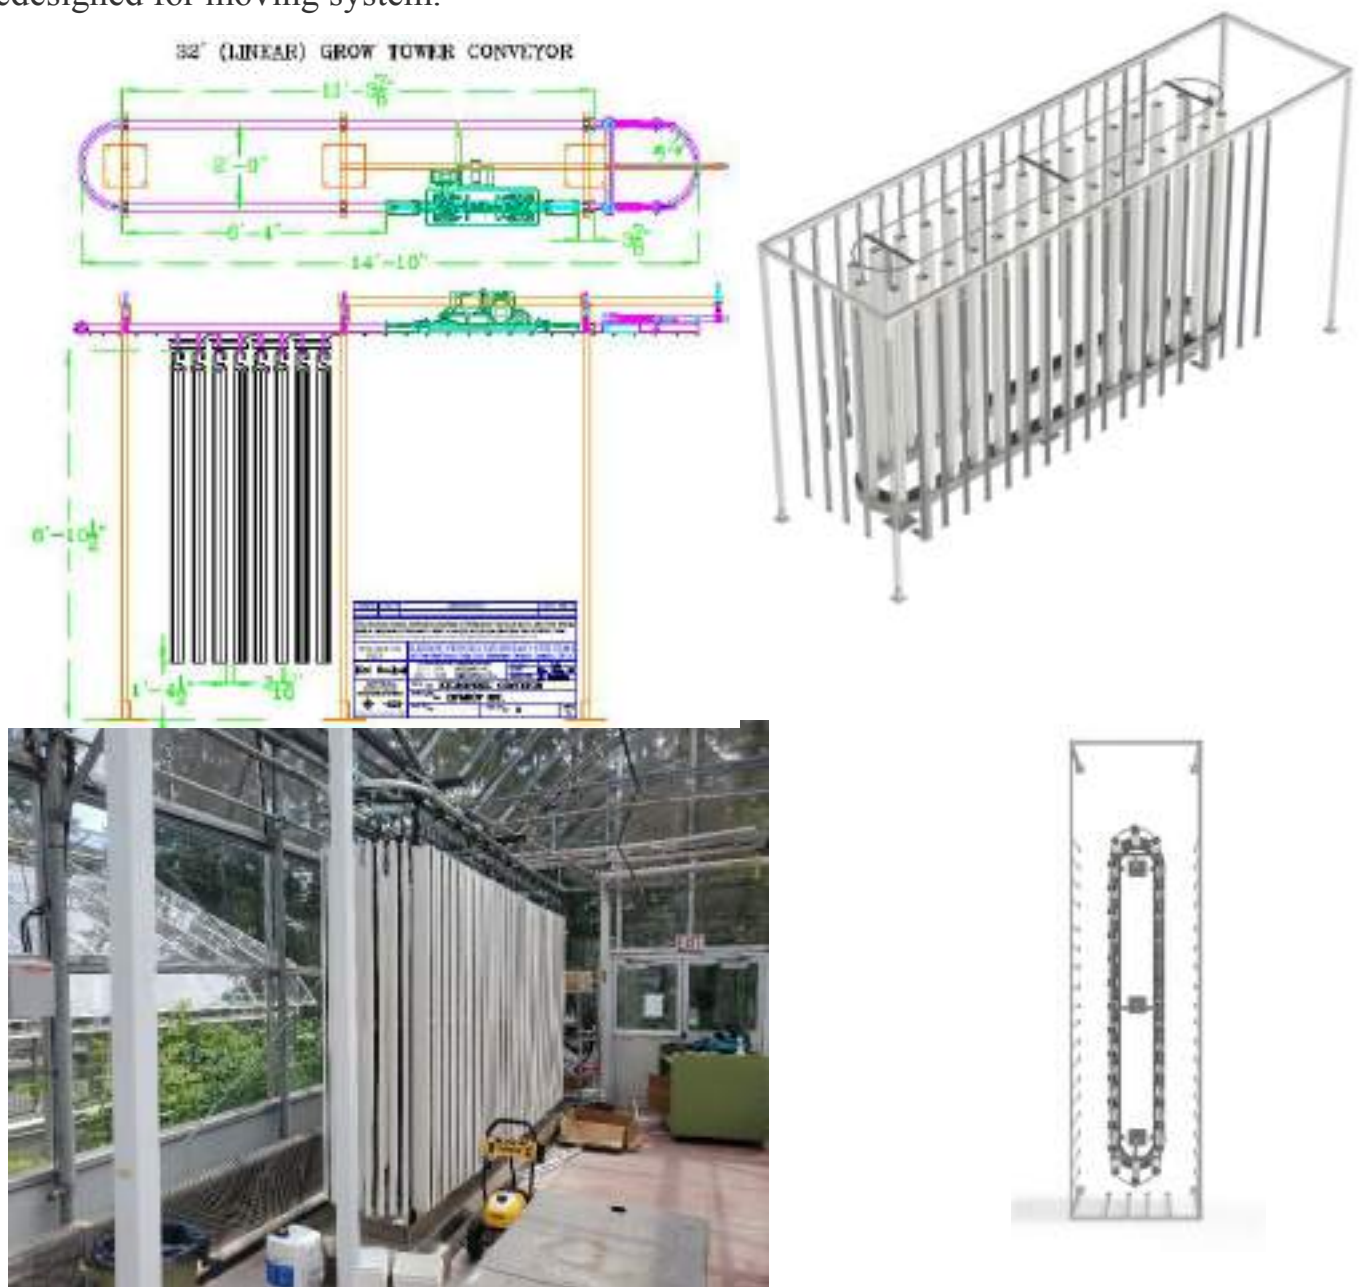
Linear Grow Tower Conveyor (Belt Conveyor)
